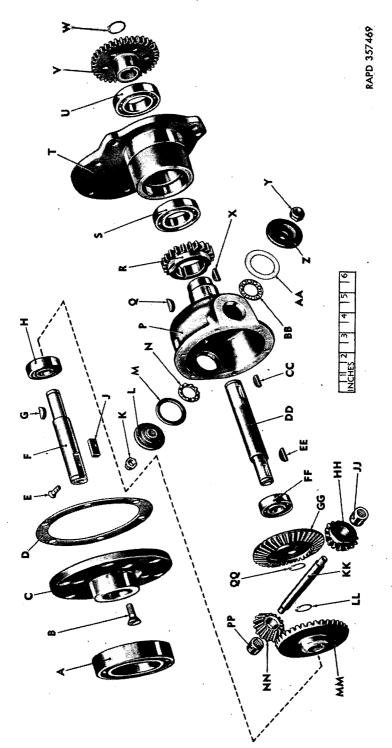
Differential and driven gear assembly and retainer, exploded view.
